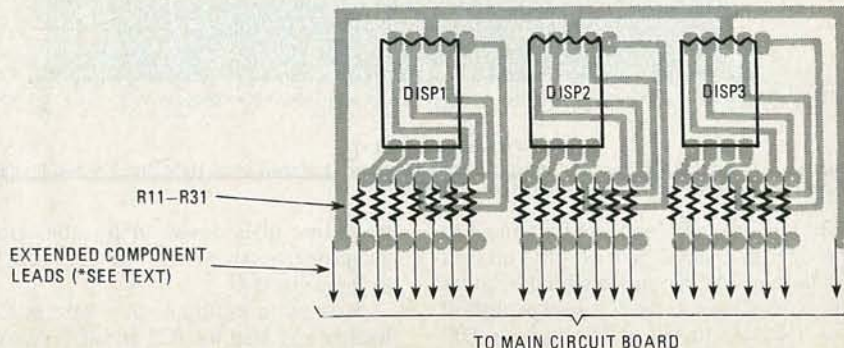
THE PARTS-PLACEMENT DIAGRAM for the display board is shown here.
